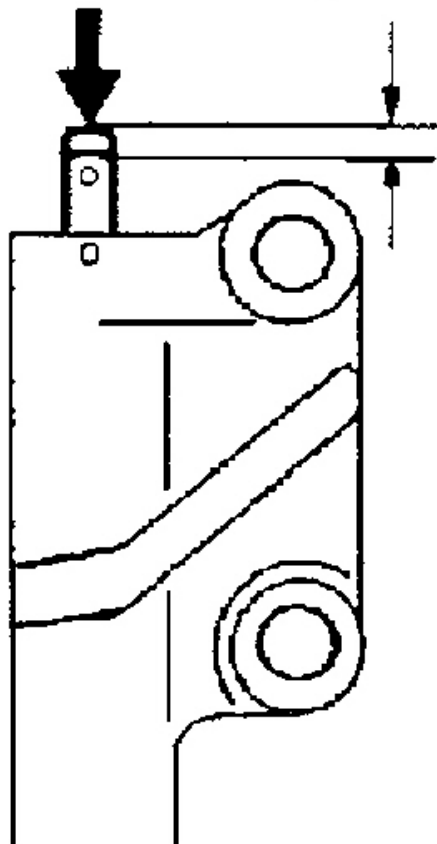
Checking Auto-Tensioner Rod Projection Length
